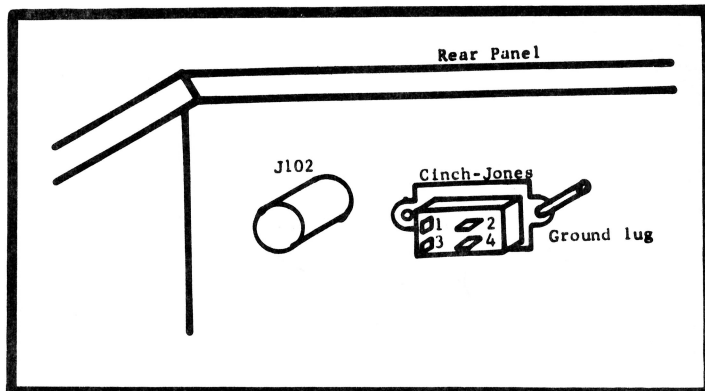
Cinch-Jones Socket Mounted to Model 240A. The socket, located in the rear panel, is used for remote programing.
